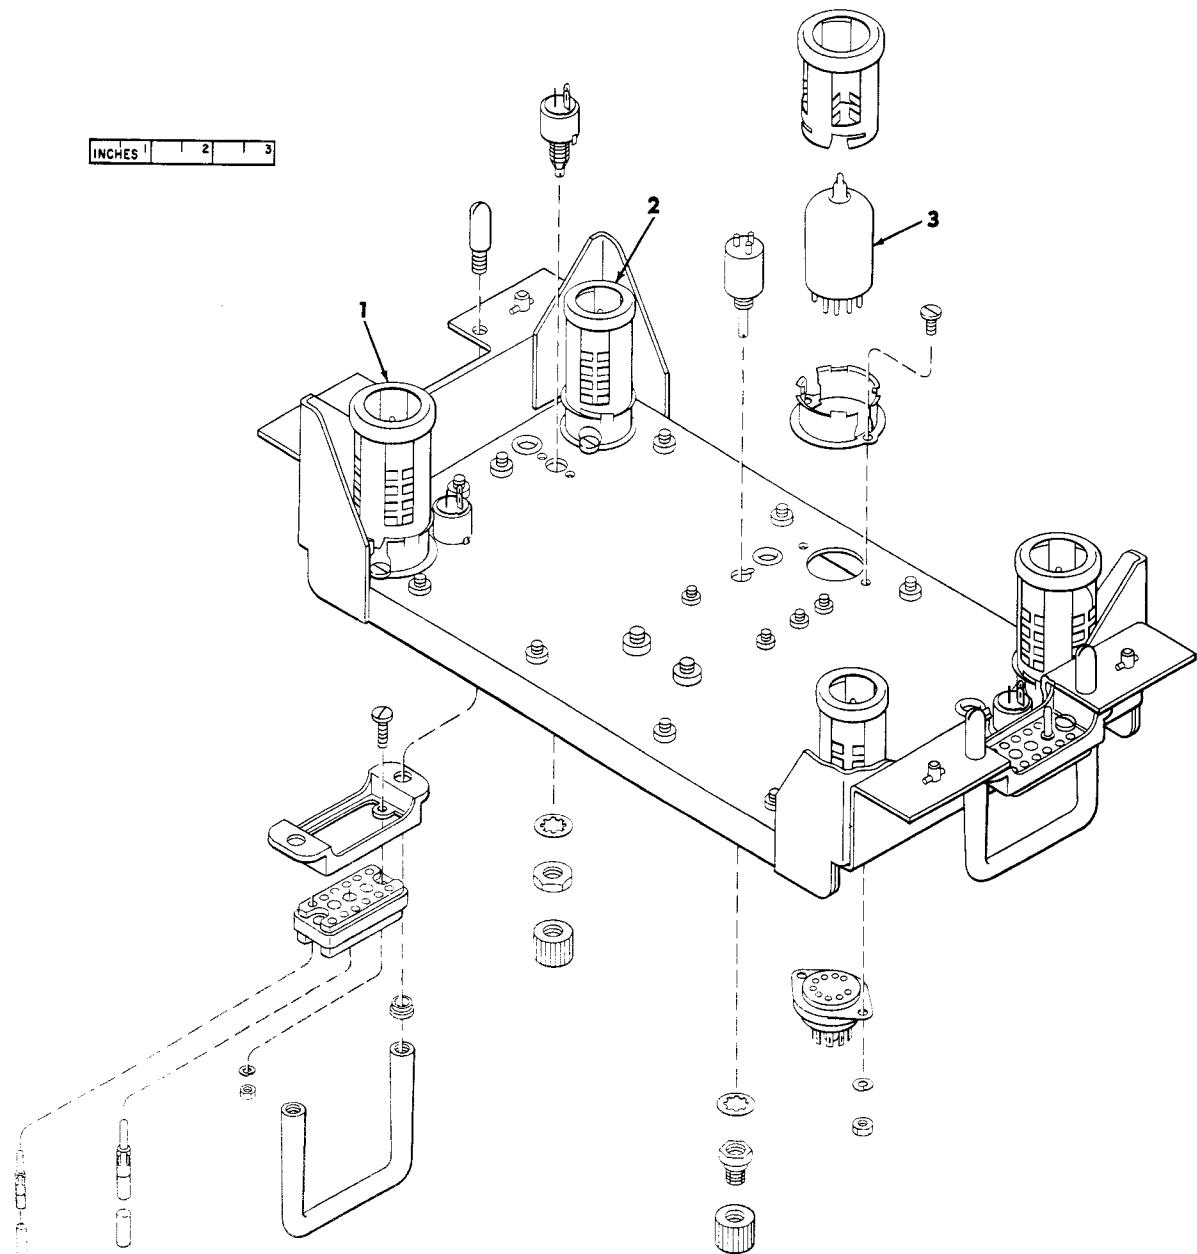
Amplifier, direct current (9145029) - partial exploded view
